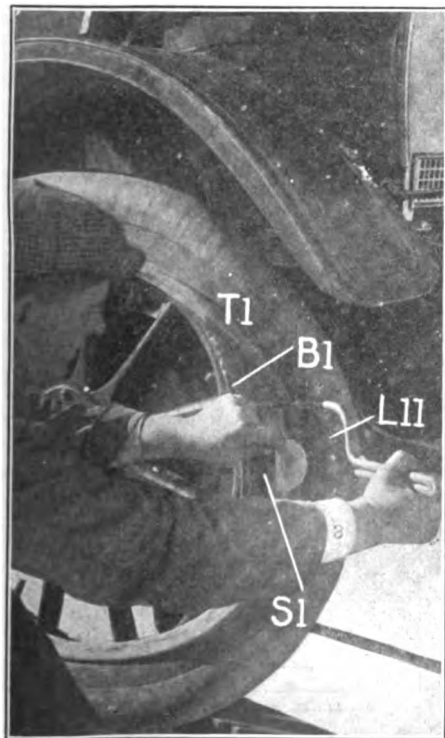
Correct method of inserting security bolts and valves with a forked lever
